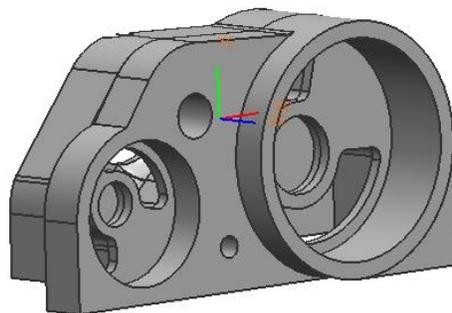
Pace Products multi-stage gerotor scavenge pump
